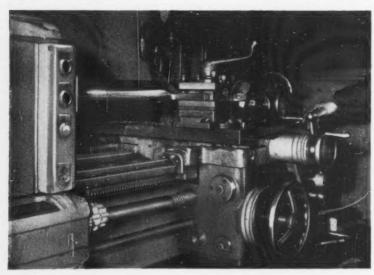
Turning a Medium Carbon Steel Billet on a 20 h.p. Krasni Proletarii Lathe with a Tool Bit of Soviet Ceramic CM332. The Cutting Speed is 2,296 ft. per min., the Feed Rate, 0.011 in. per rev., and the Depth of Cut, 0.079 in.
